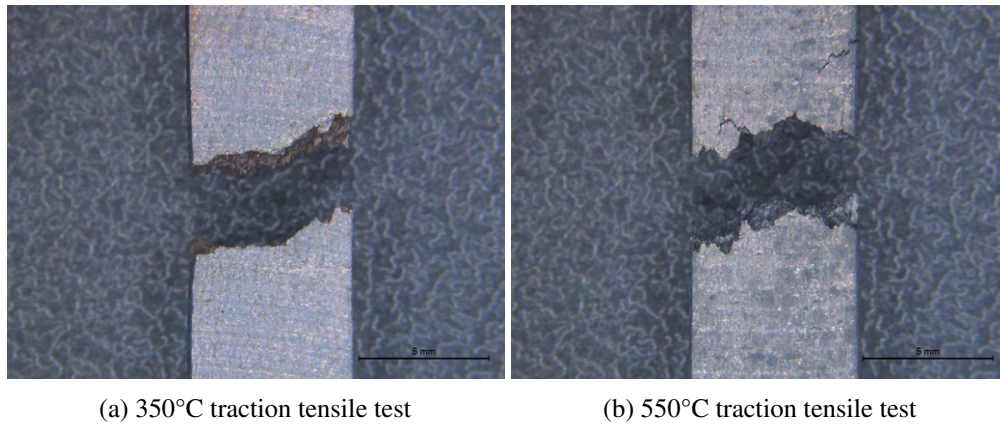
Optic images of the tensile traction fracture surfaces - part B
